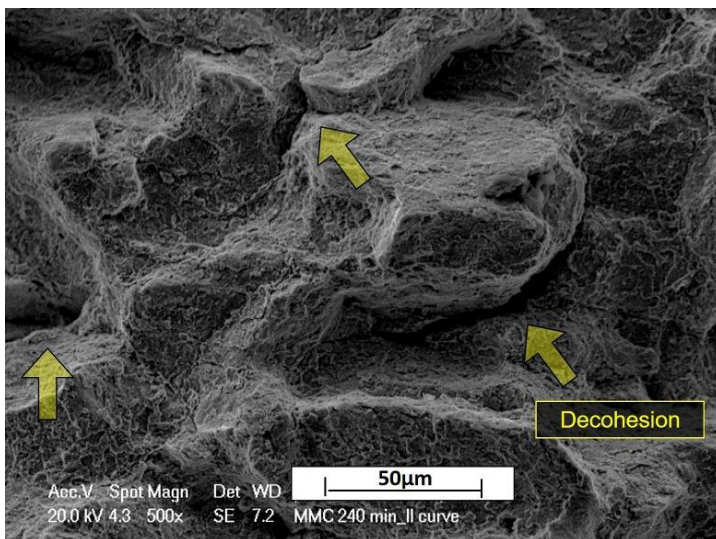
Fracture surfaces of the sintered MMC-240' specimen.
